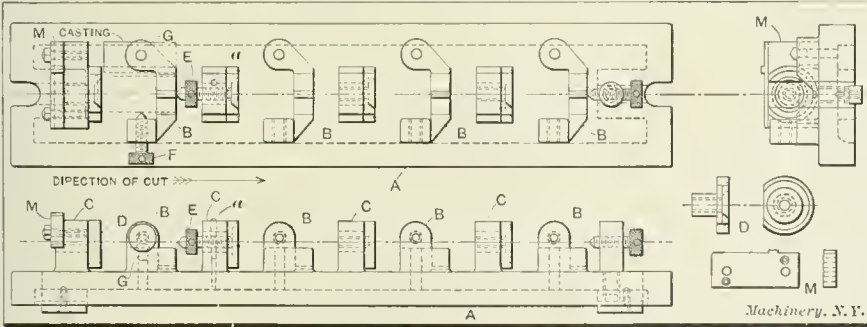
Fixture used in Milling the Casting shown in Fig. 1
